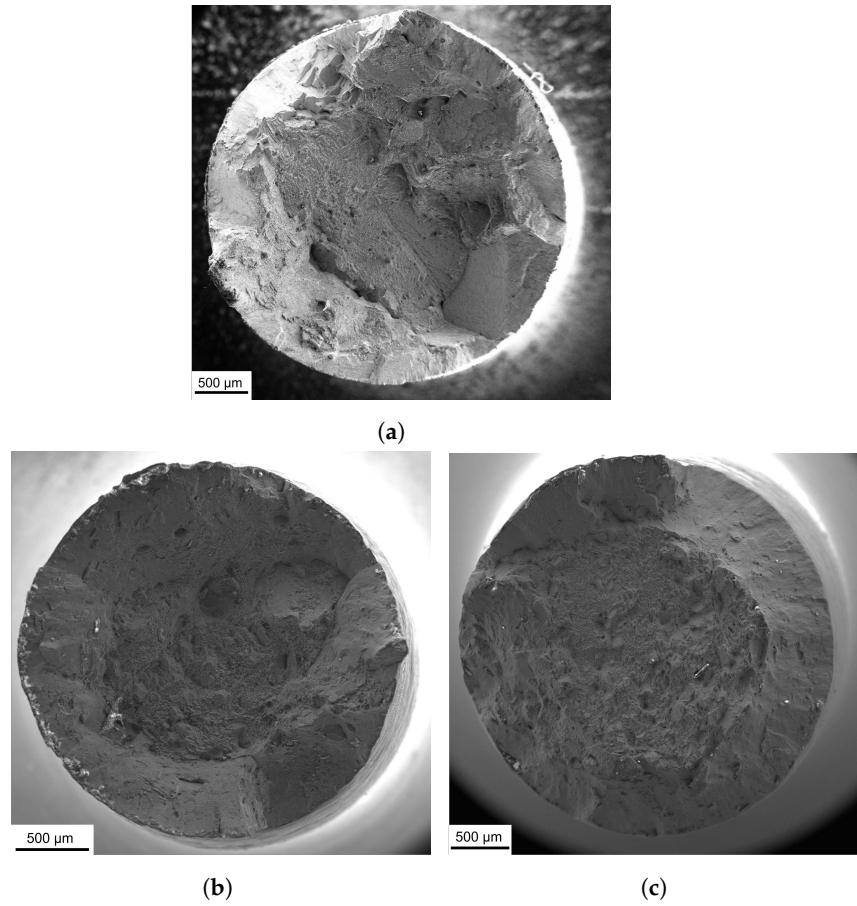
Overview of UT fracture surfaces: (a) W-WQ; (b) SLS; (c) SLM.
